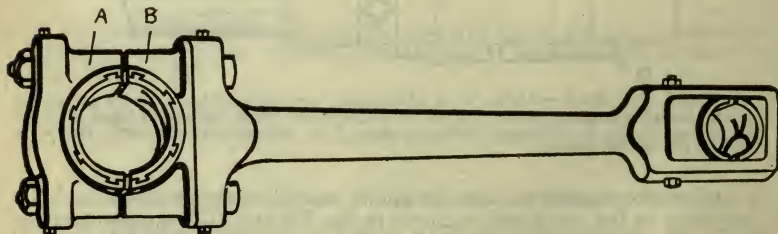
The Phoenix connecting rod. The crank pin end is of the marine type while the wrist pin end is solid with block adjustment. The illustration shows the arrangement of oil grooves, and the recesses in the brasses to retain the Babbitt lining in place.
